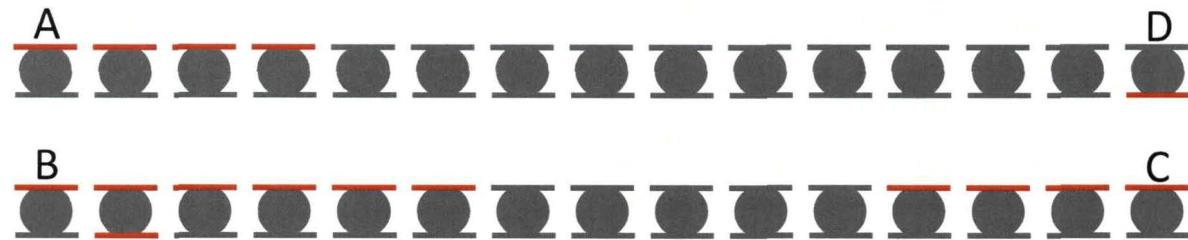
shows cross-sectional micrographs of corner solder balls depicting cracks at component pads on views A, B and C. Crack at the PWB pad detected on view D.
